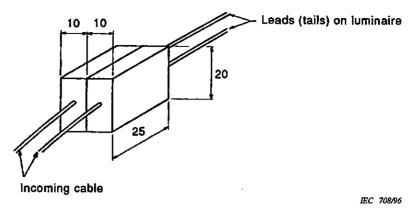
Terminal block arrangement for installation test for luminaires with connecting leads (tails)
